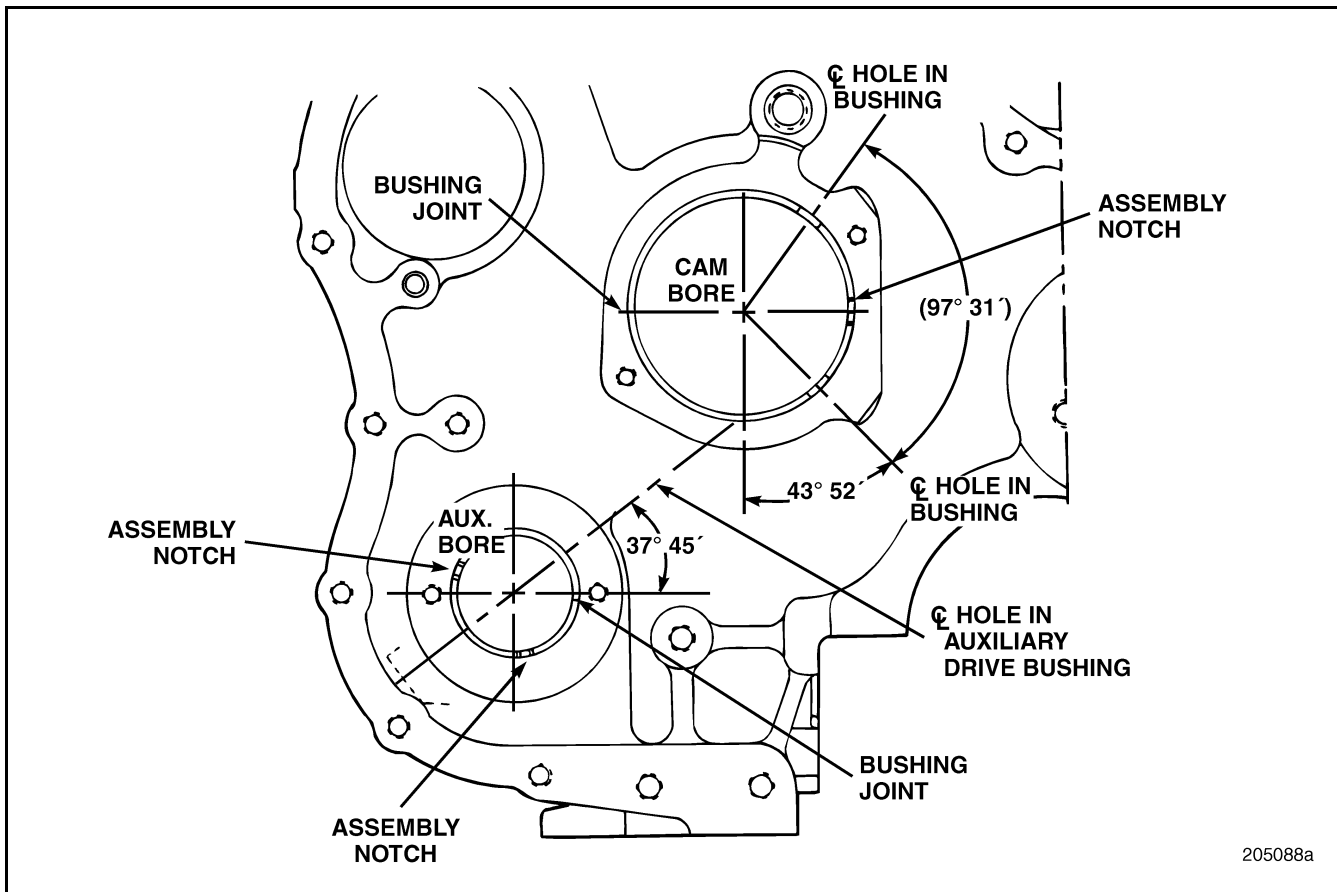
Front Camshaft and Auxiliary Shaft Assembly Notch Locations
